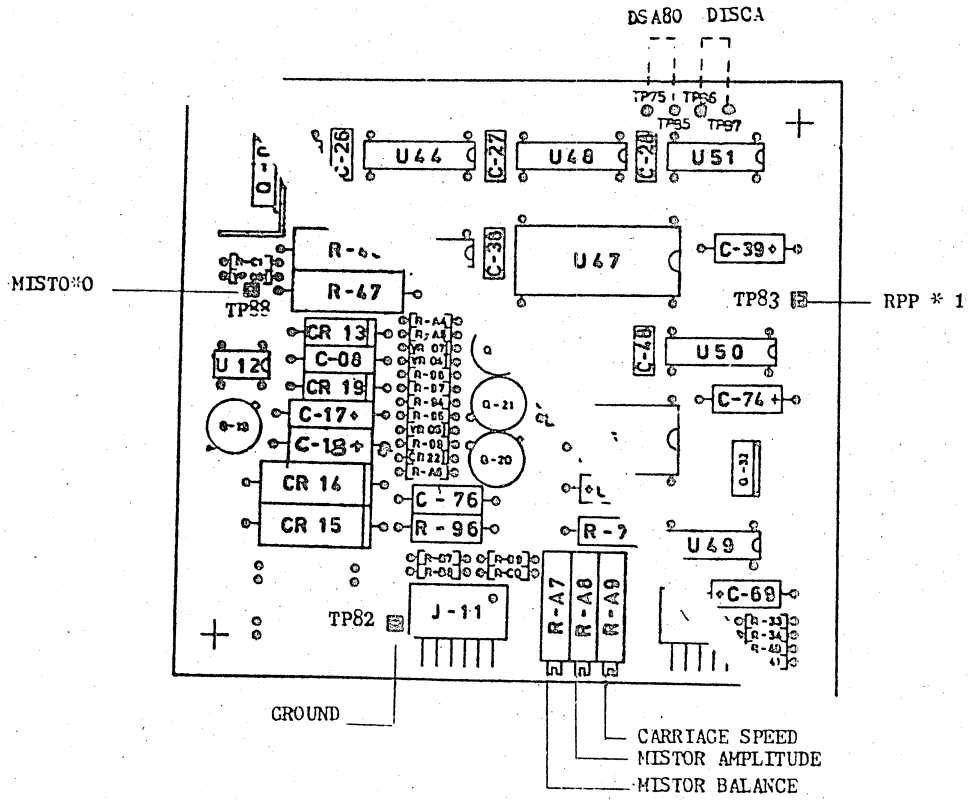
PWA DRIVE P/N. 78117135-001/002
